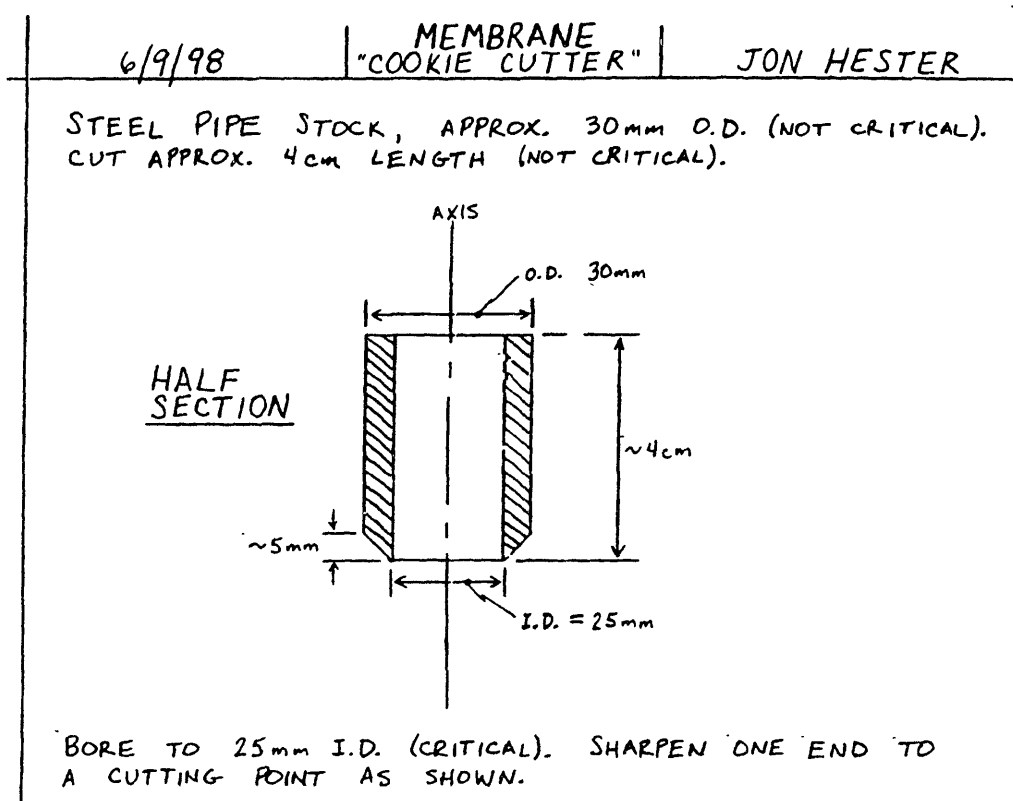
Machine drawing of 25 mm diameter membrane cutting die
